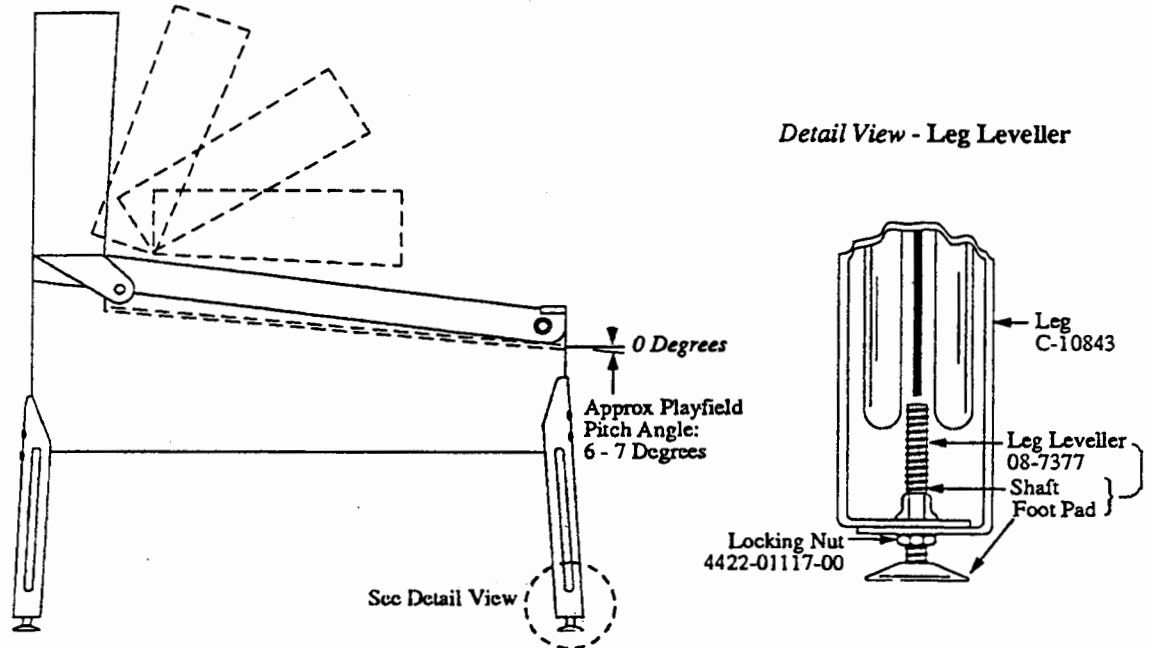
Pinball Assembly, Playfield Pitch Angle, and Leg Leveller Details.
